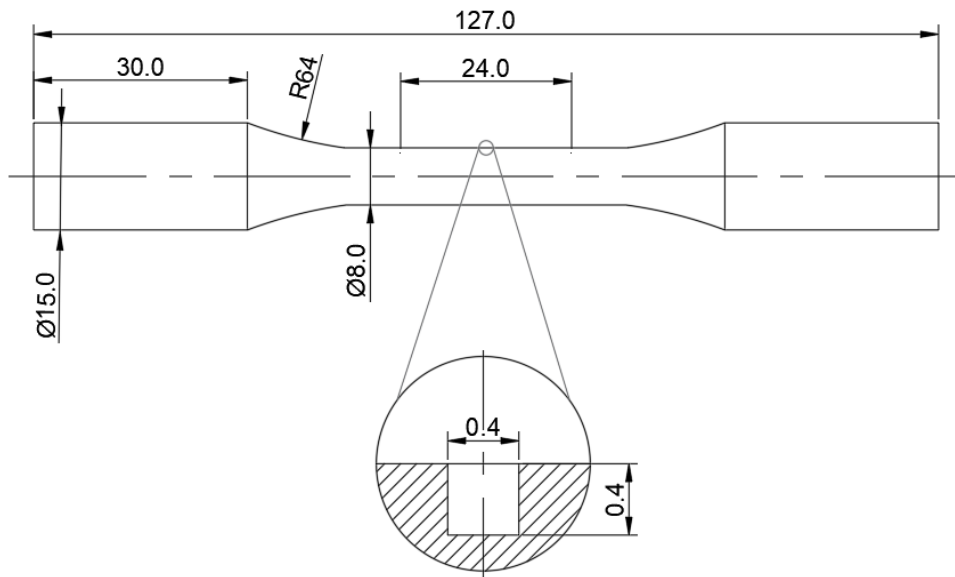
Specimen used in the fatigue tests (dimensions in mm).
